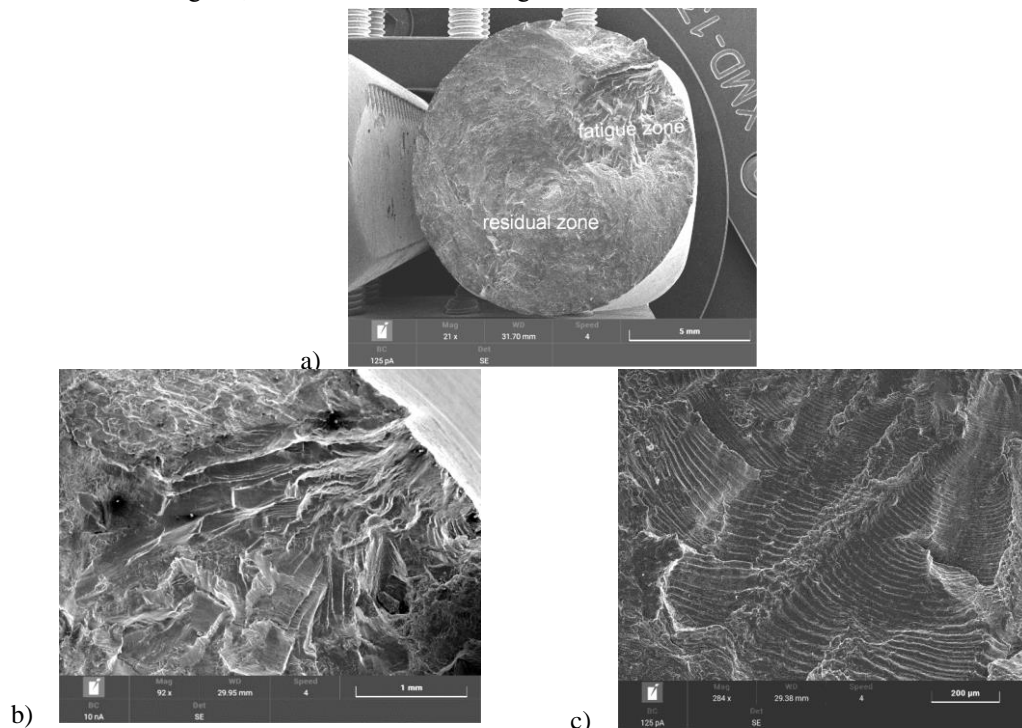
Fatigue fracture of the alloy after T64 treatment caused by combination of bending and torsion $\tau_a=0.5\sigma_a$ (a) fracture morphology, b-c) fatigue bands in the fatigue zone (specimen 35 – 2671 cycles).
